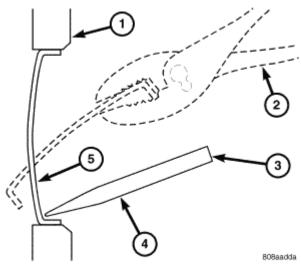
CORE HOLE PLUG REMOVAL Courtesy of CHRYSLER LLC
